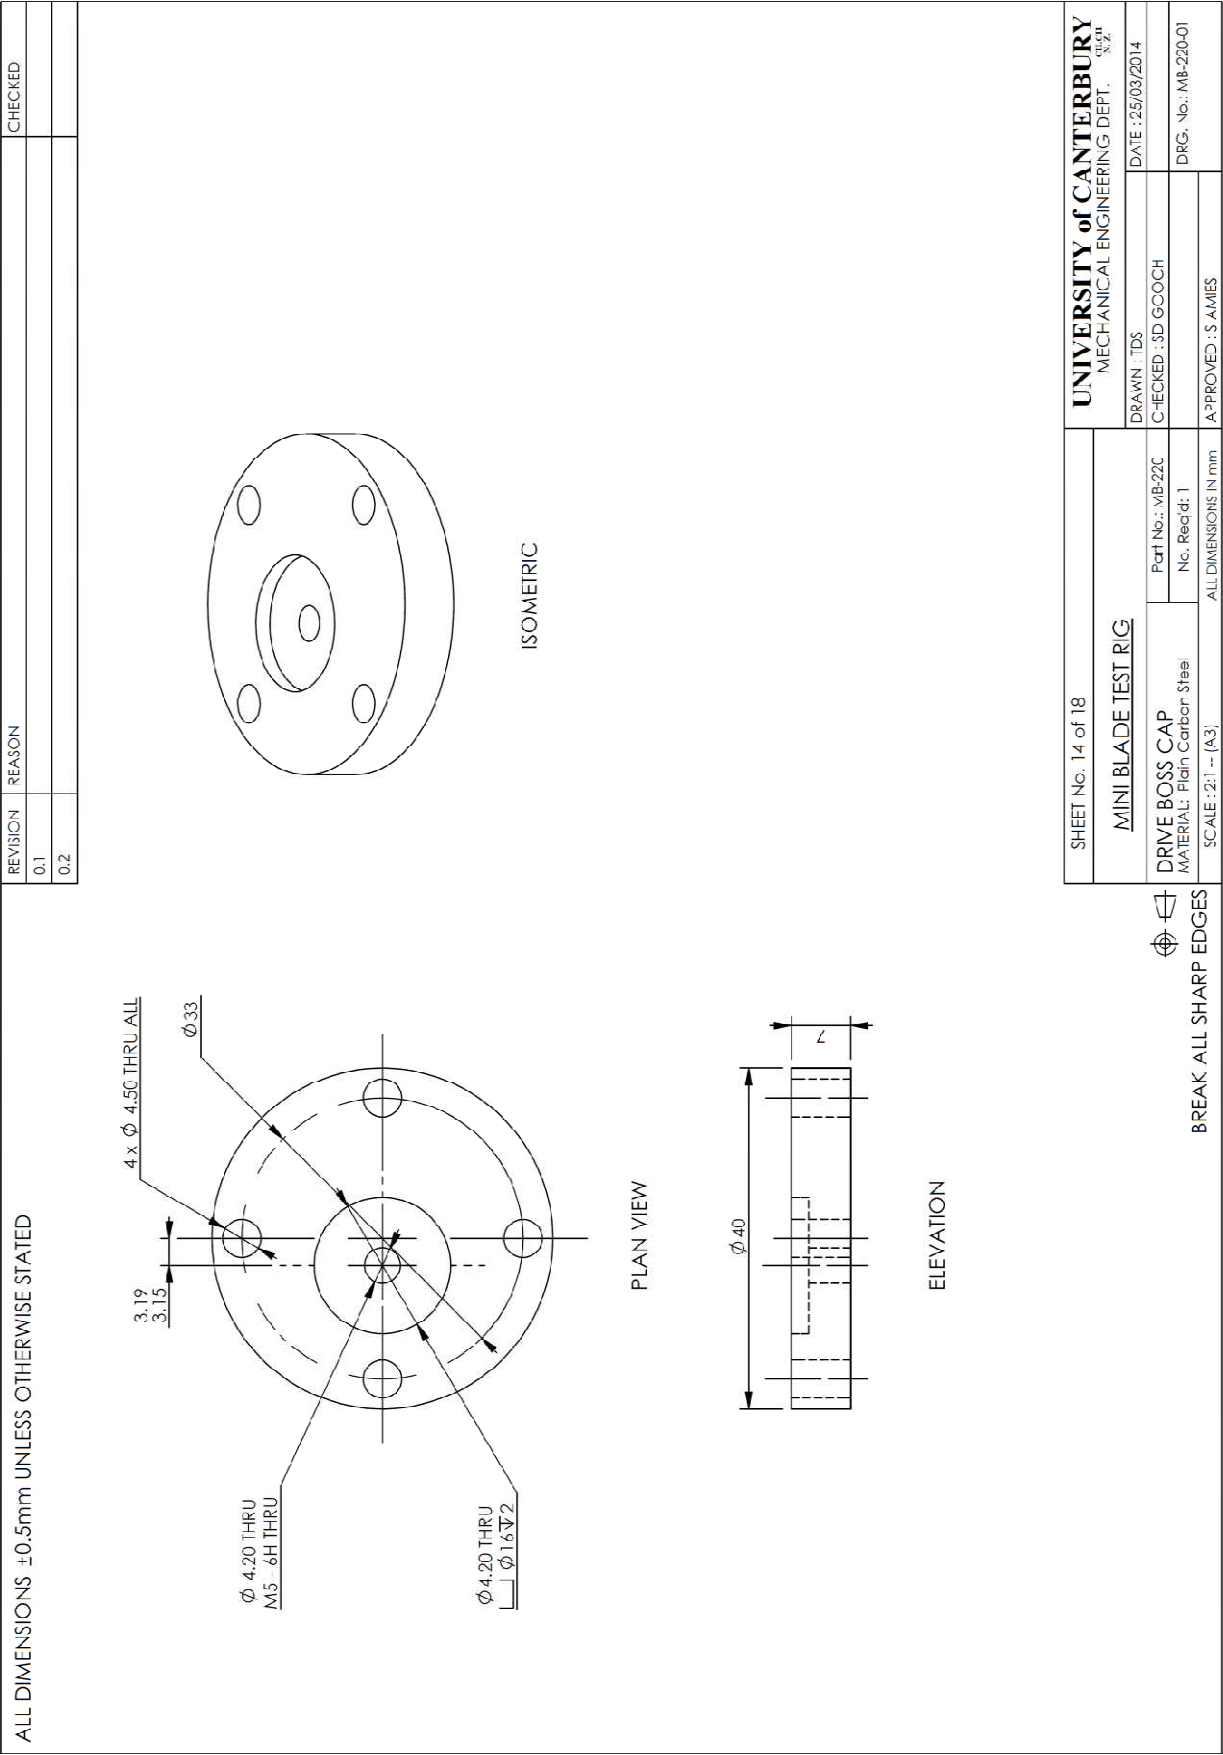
Manufacturing drawing for the drive boss cap in the variable stroke test rig.
